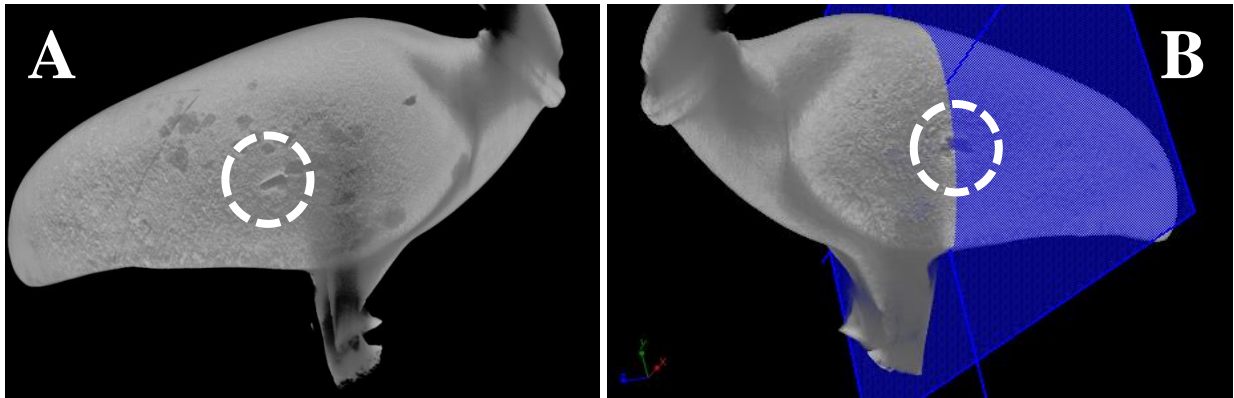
Right side view (A) and left side view (B) with the latter including a Z-axis sectional representation for reference purposes.
